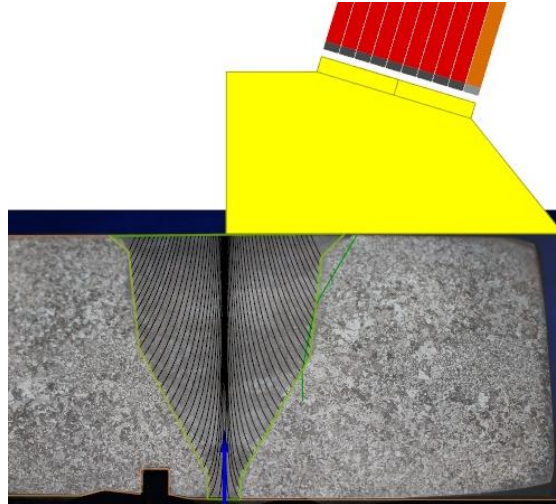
Relative position of probe and weld and description of weld in CIVA using the Ogilvy model. Specimen 2 is shown.
